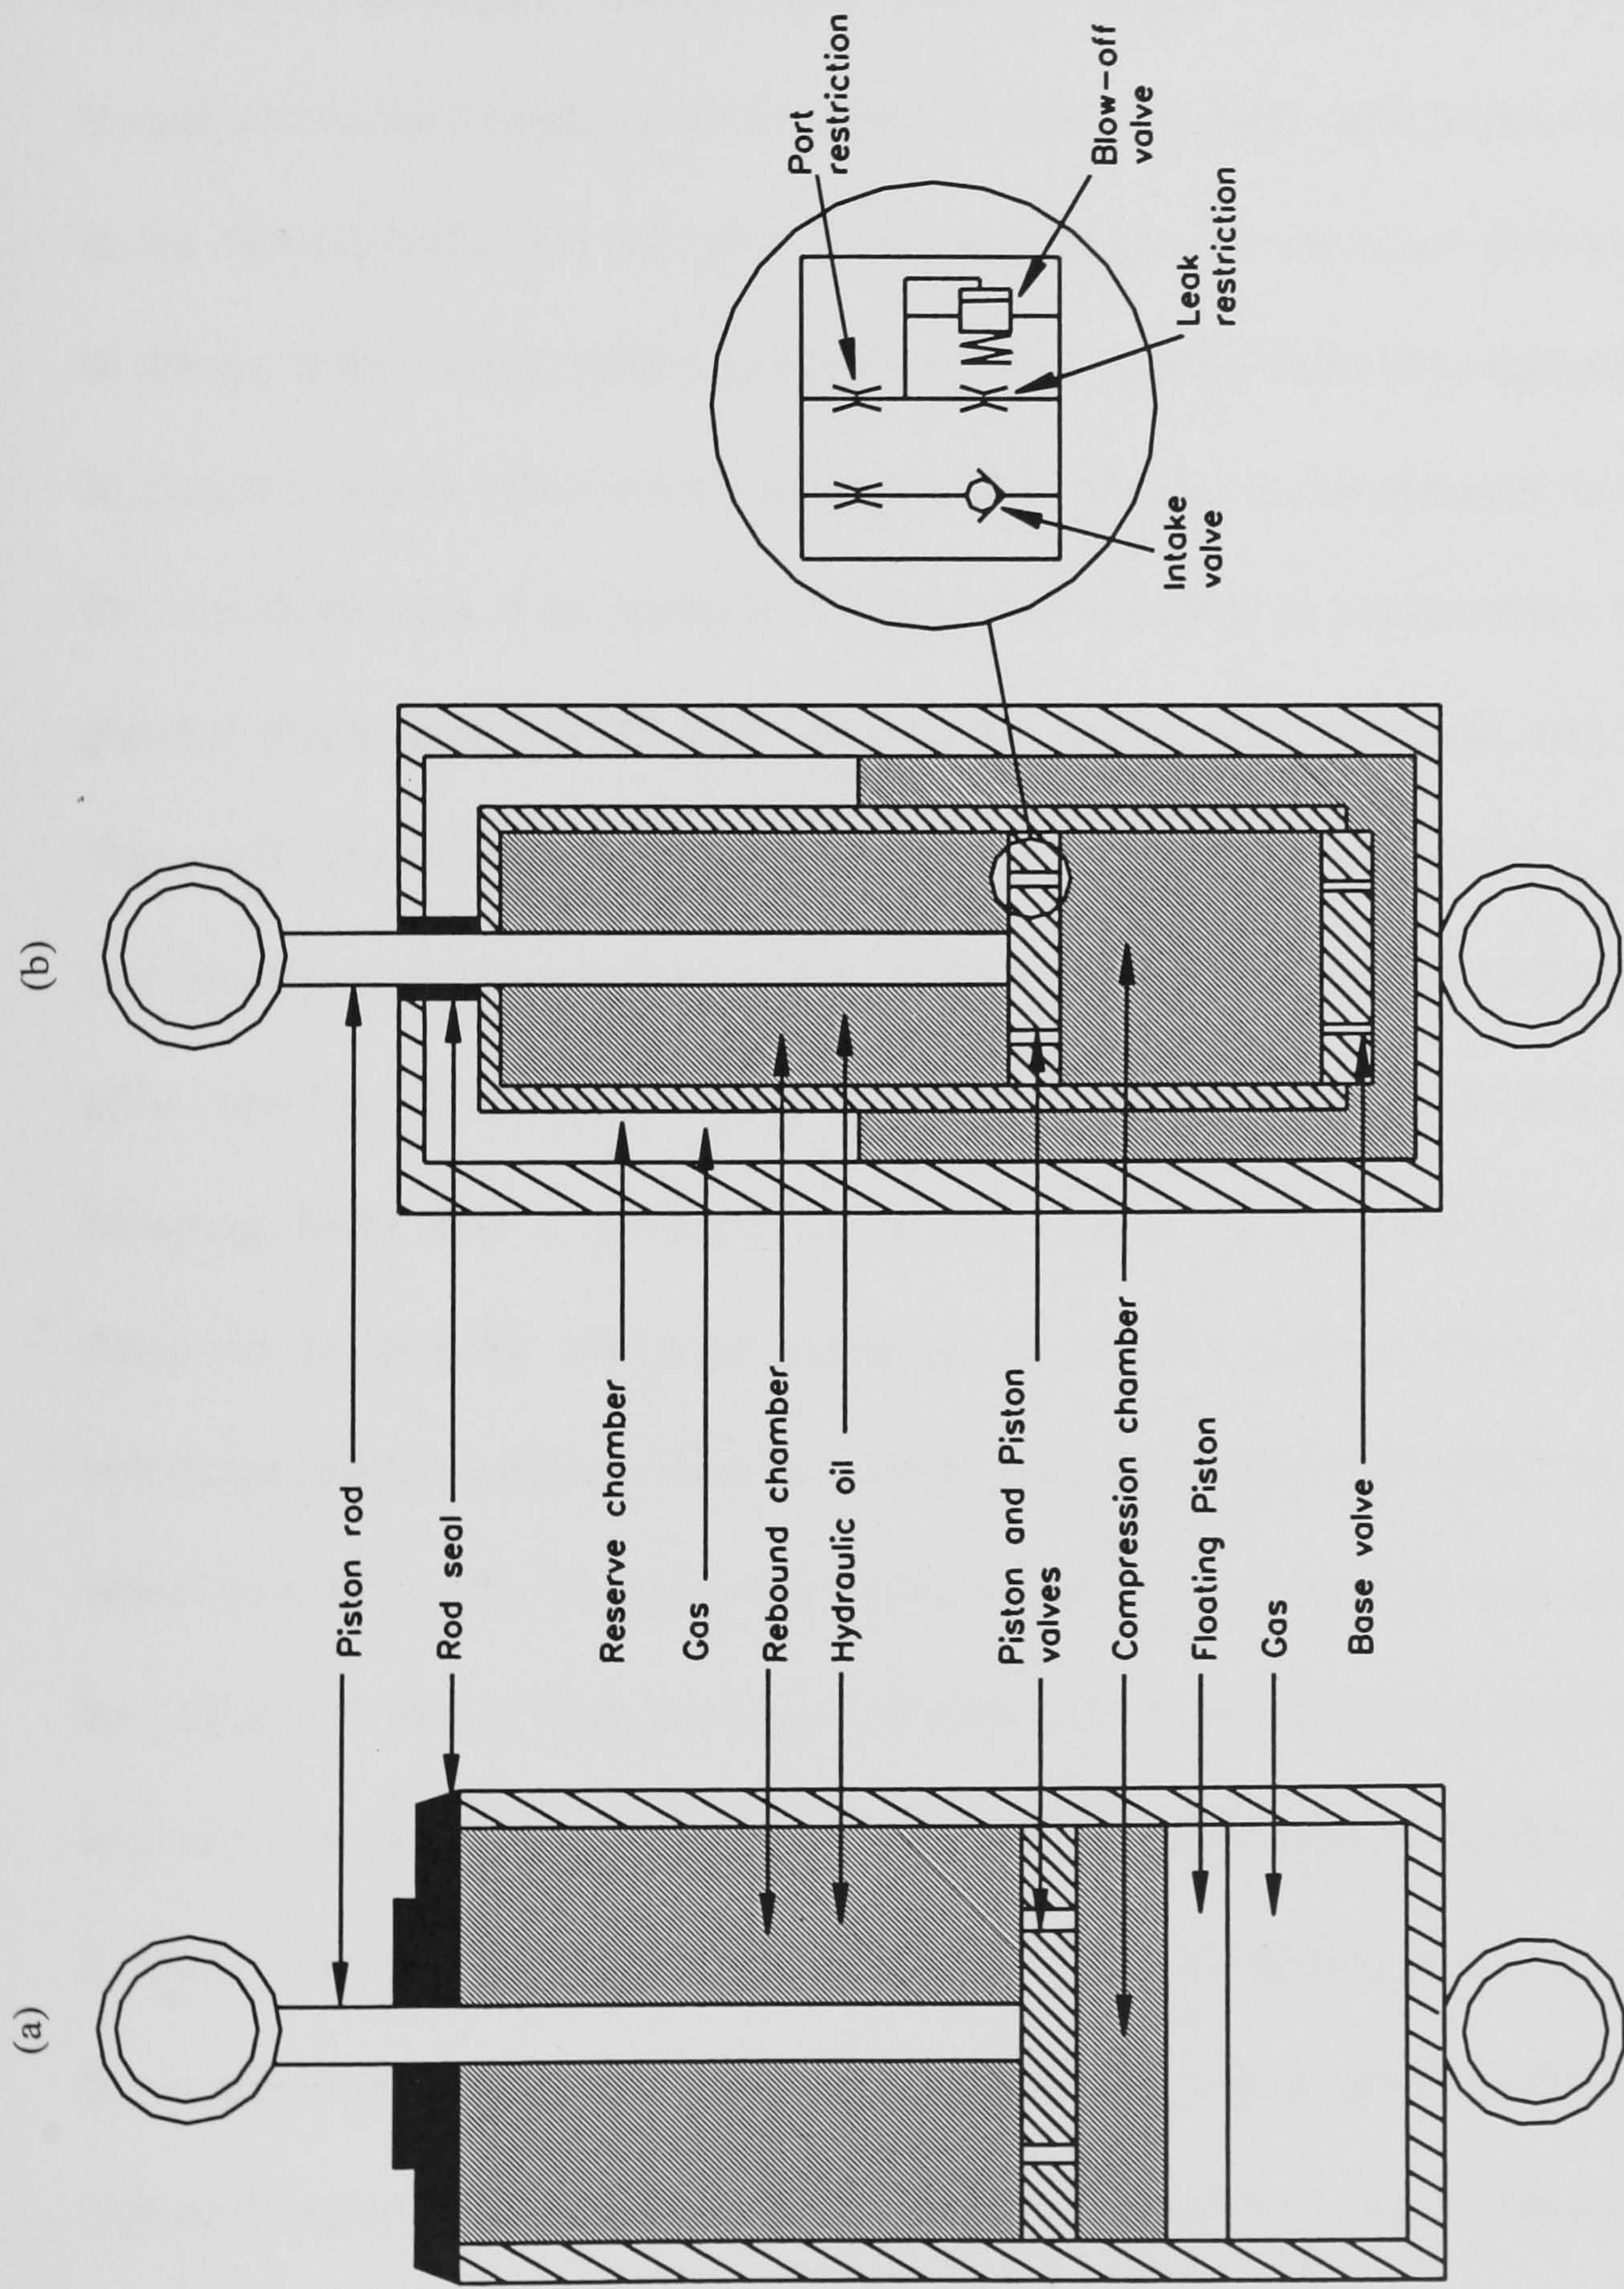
A sketch layout of typical hydraulic automotive dampers; (a) Gas-pressurised monotube, and
